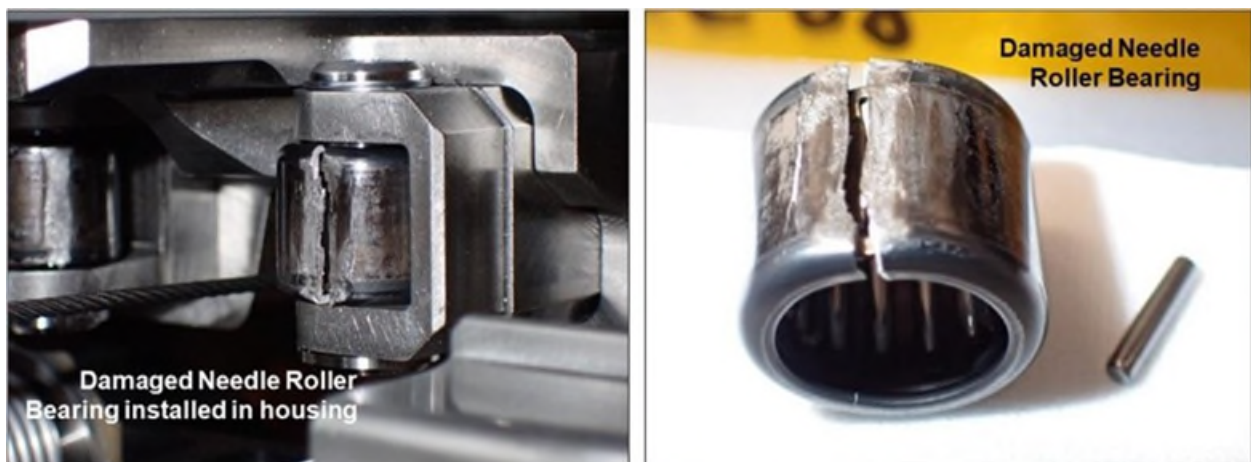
Upper Launch Lock Fractured Needle Roller Bearing
